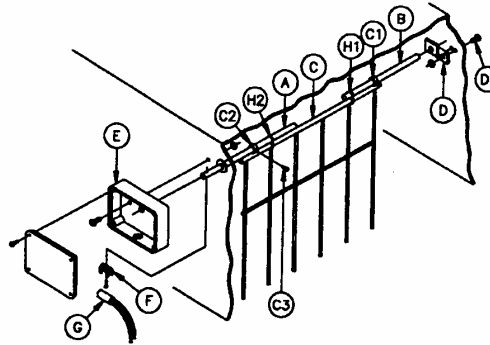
Mounting Sensor and Start Gate on Dishmachine
